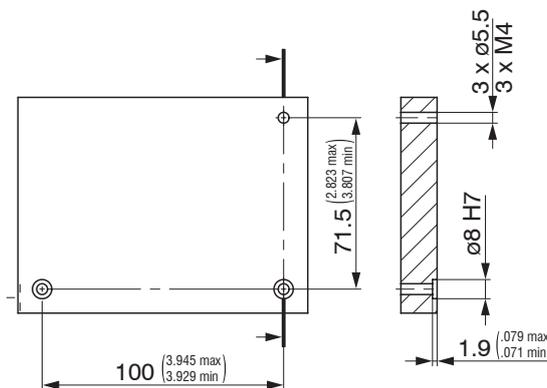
Dimensional drawing for mounting holes, all dimensions in mm, not to scale
